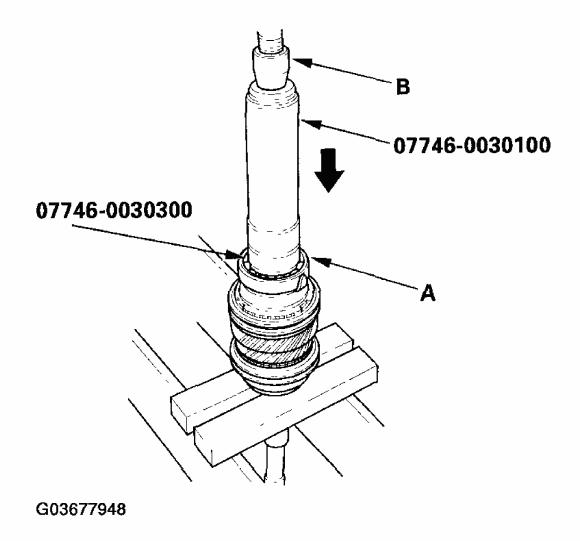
Installing Ball Bearing Courtesy of AMERICAN HONDA MOTOR CO., INC.
